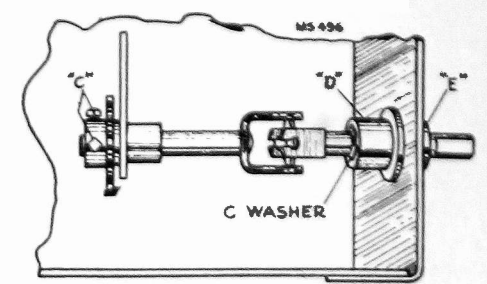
The late production range switch coupling shaft of the RCA 612V series.
